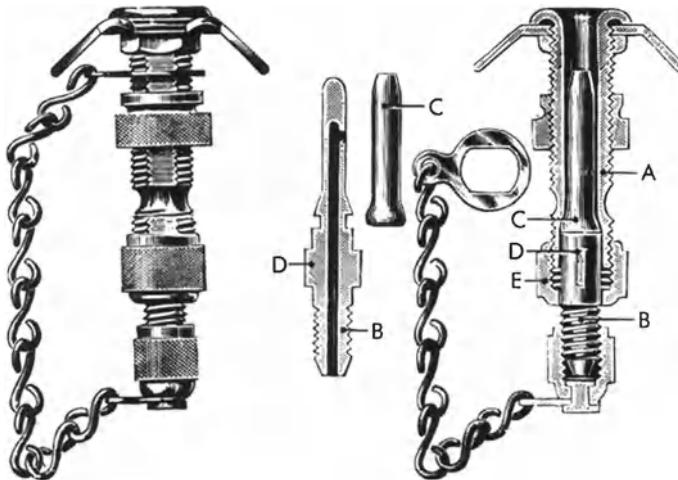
A Wood's valve is characterized by a body D with two holes that intersect each other with a right angle. On this cylindrical body a rubber tube C is fitted, working as a check valve (redrawn from Tompkins 1981)
